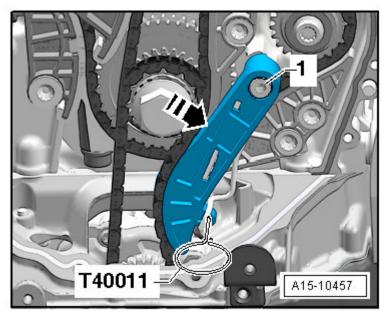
Identifying Oil Pump Chain Tensioner And Locking Pin T40011 Courtesy of VOLKSWAGEN UNITED STATES, INC.
